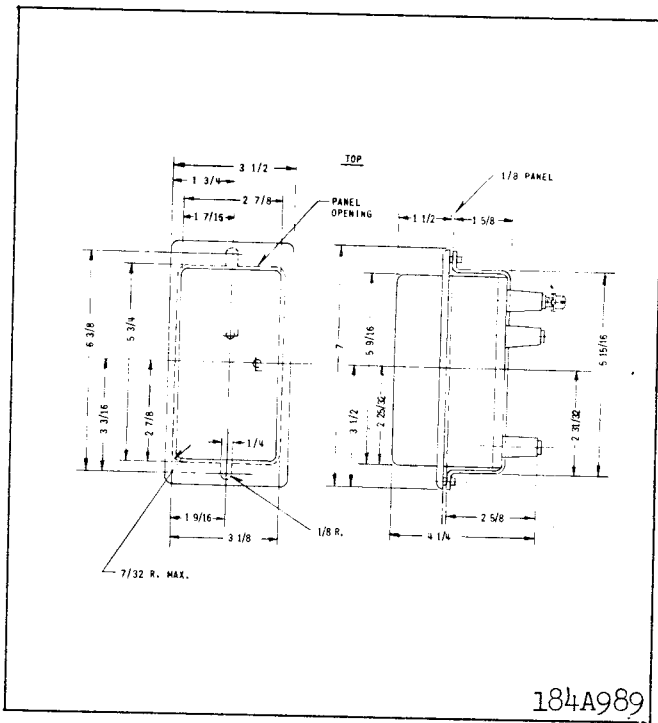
Outline & Drilling Plan for External Remote Trip Resistor Assembly.
